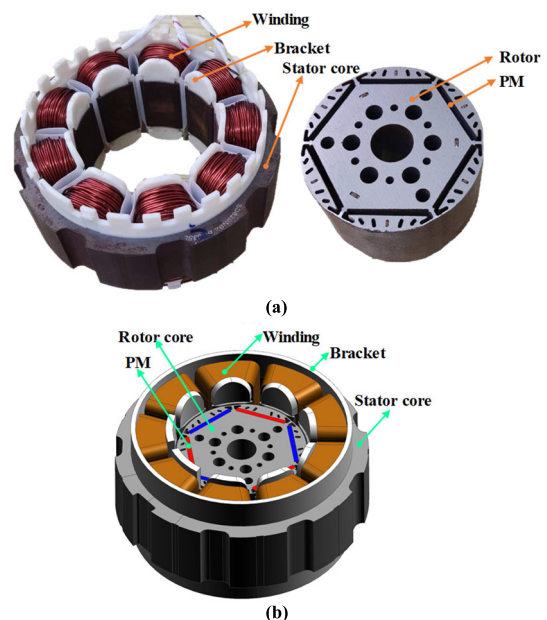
Motor diagram. (a) Physical drawings. (b) Equivalent model drawings.
